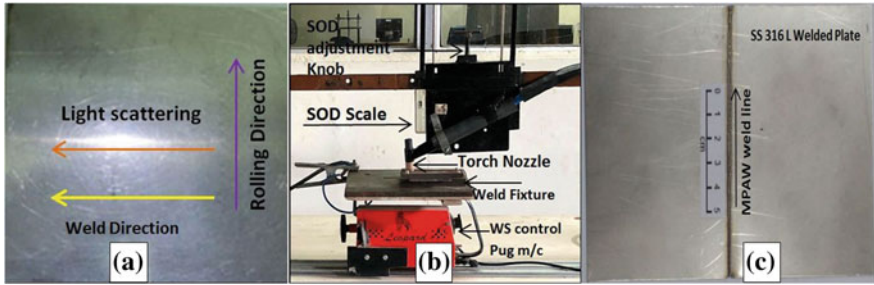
a Weld direction and rolling direction, b torch and fixture equipped with SOD adjustment, c welded plate
